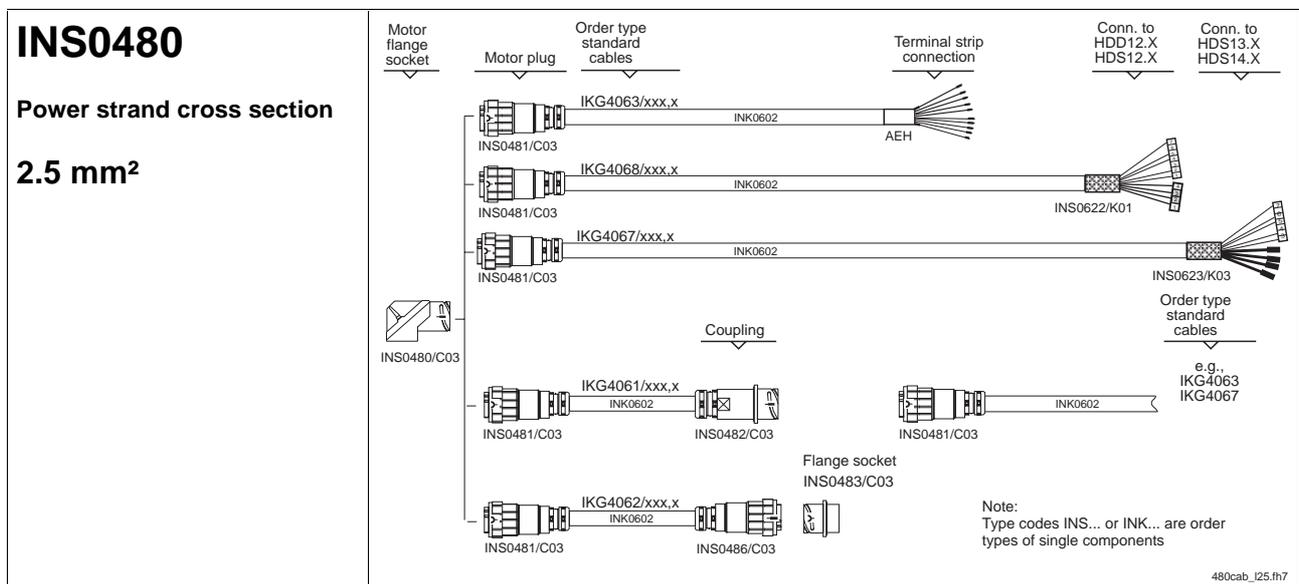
Motor power cable 2.5 mm<sup>2</sup> of flange socket INS0480
